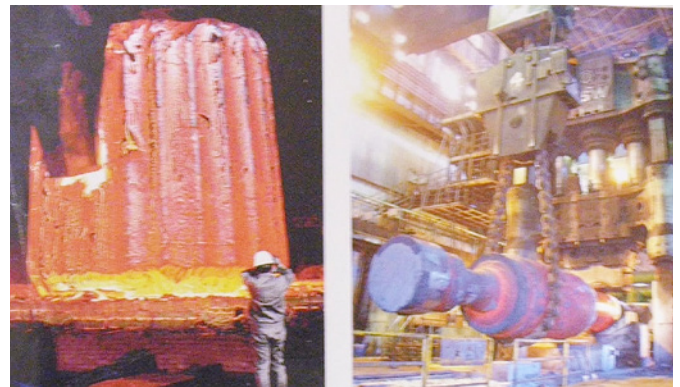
14 kt Hydraulic Press Machine and 250t turbine rotor of JSW factory. (14kt press machine, the biggest press of the World) (Source: Hirotaka Yamada)
